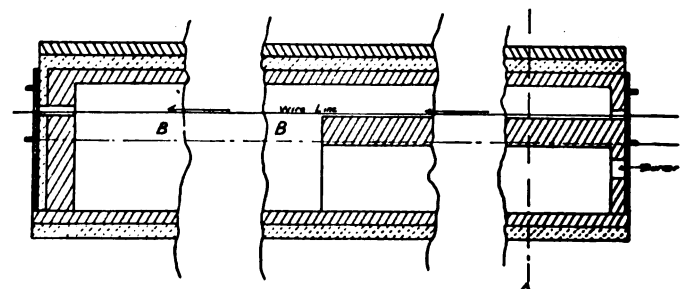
B—Longitudinal section through middle of old process patenting furnace.
